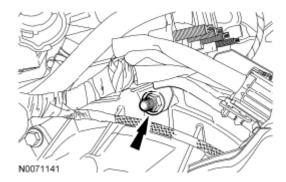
Locating CMS Wire Connector Bracket And Nut Courtesy of FORD MOTOR CO.
